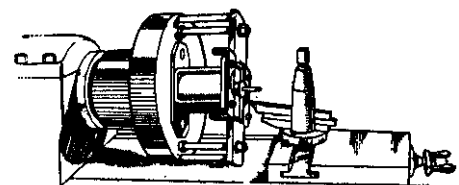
A Simple Fixture for Holding the Switch in a Lathe for Turning the Contacts.
